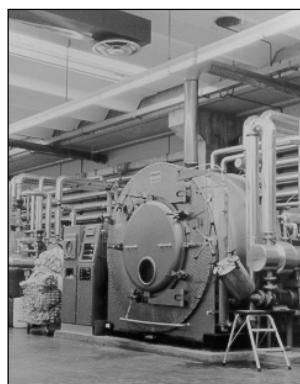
A rotary dyeing machine (courtesy of The Woolmark Co.)
